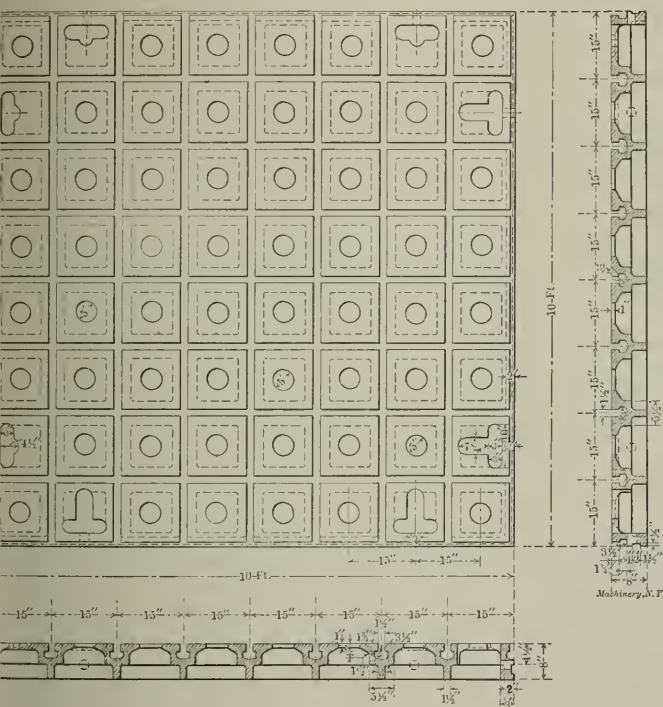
Detail Drawing of the Floorplate Section used by the General Electric Company in their New Buildings.
